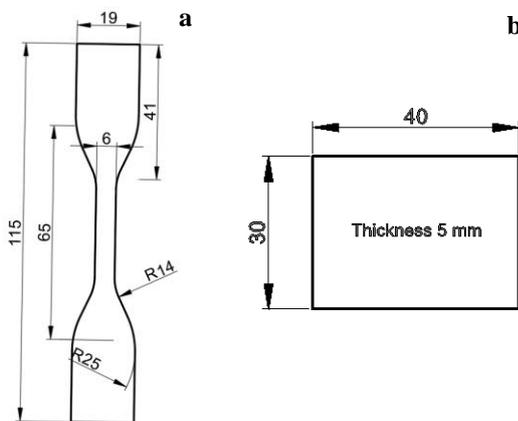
Sample dimensions (mm) for tensile specimen (a) and hardness measurement (b)
